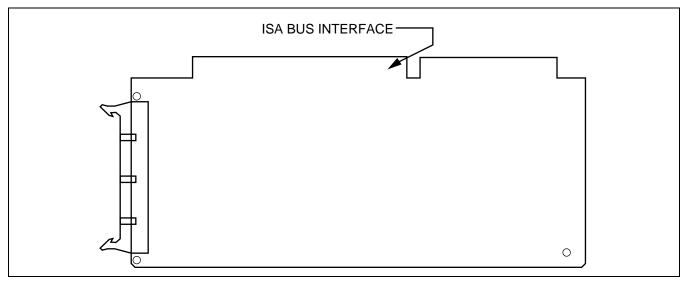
Face Layout of PZ-GT20 (ISAGT)
